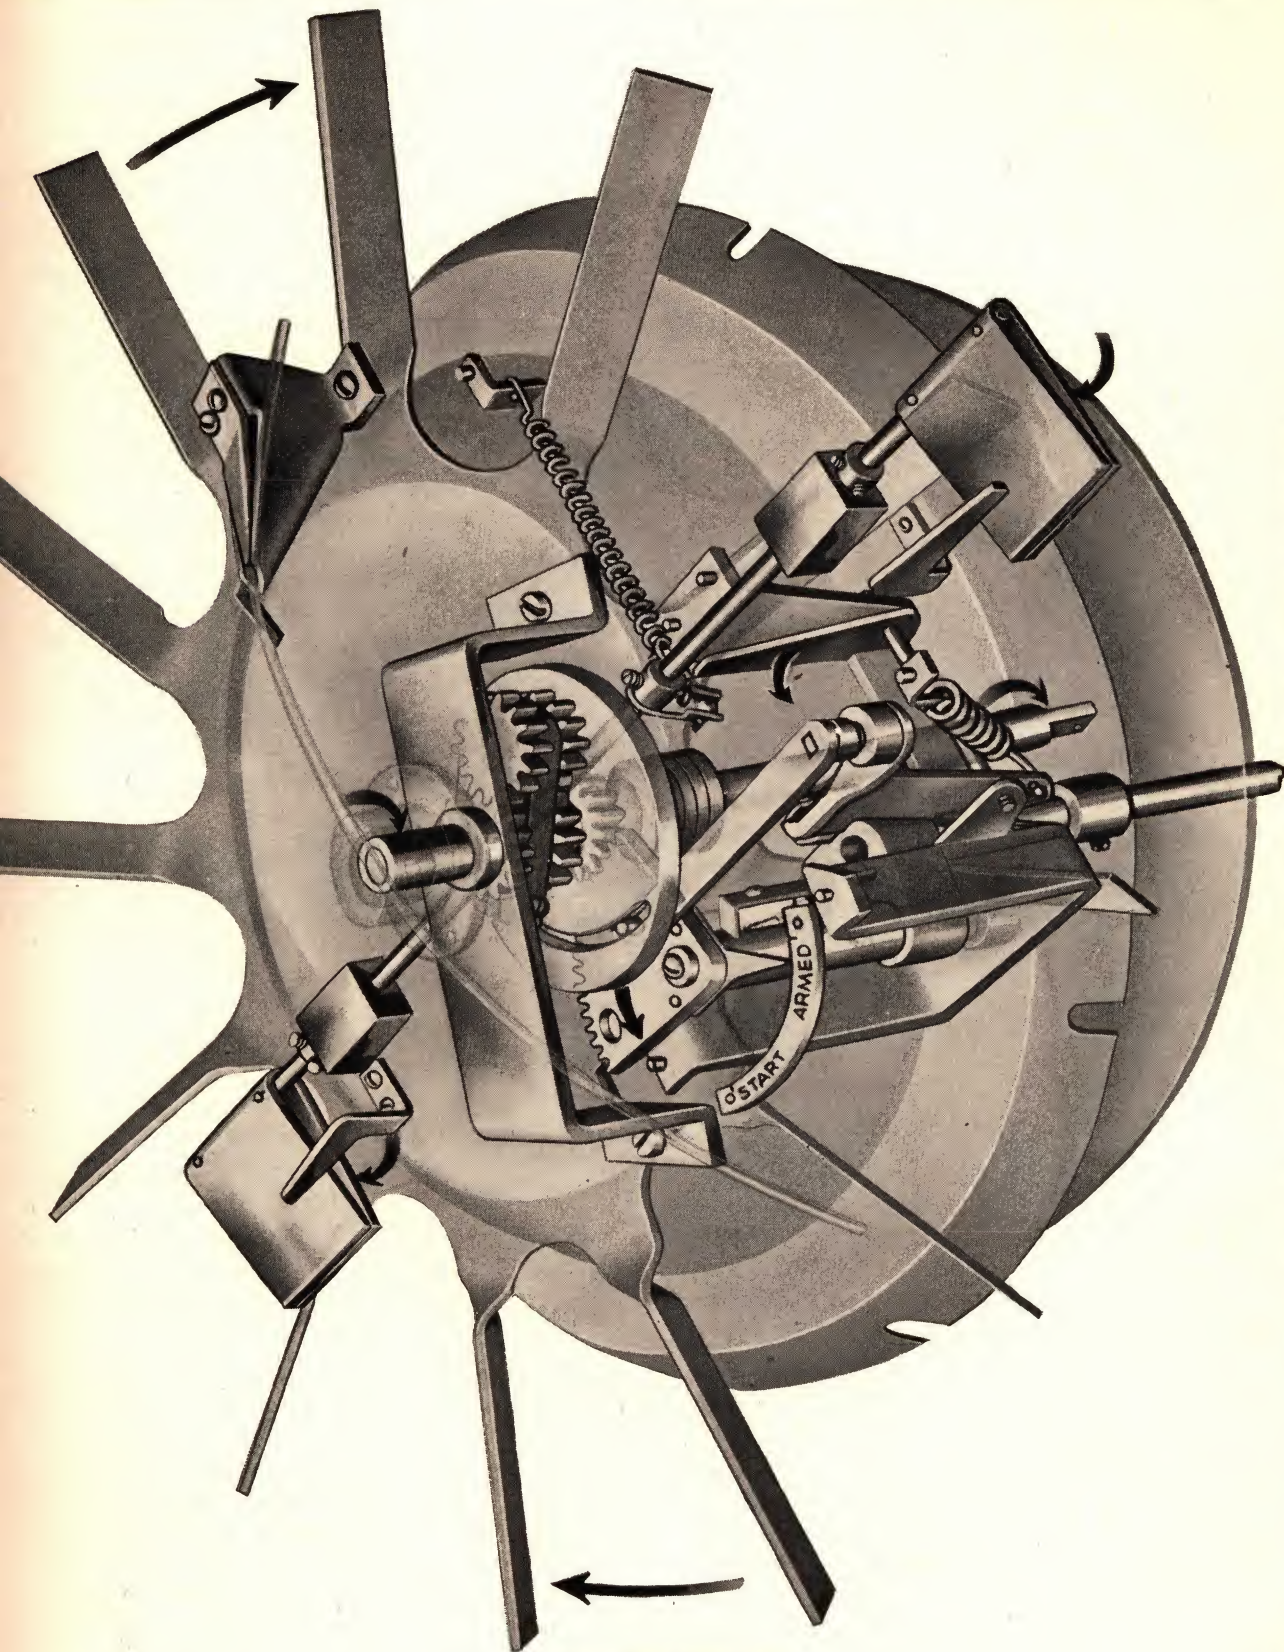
Fuze and Initiating Device Mk 151 (Perspective Drawing)
